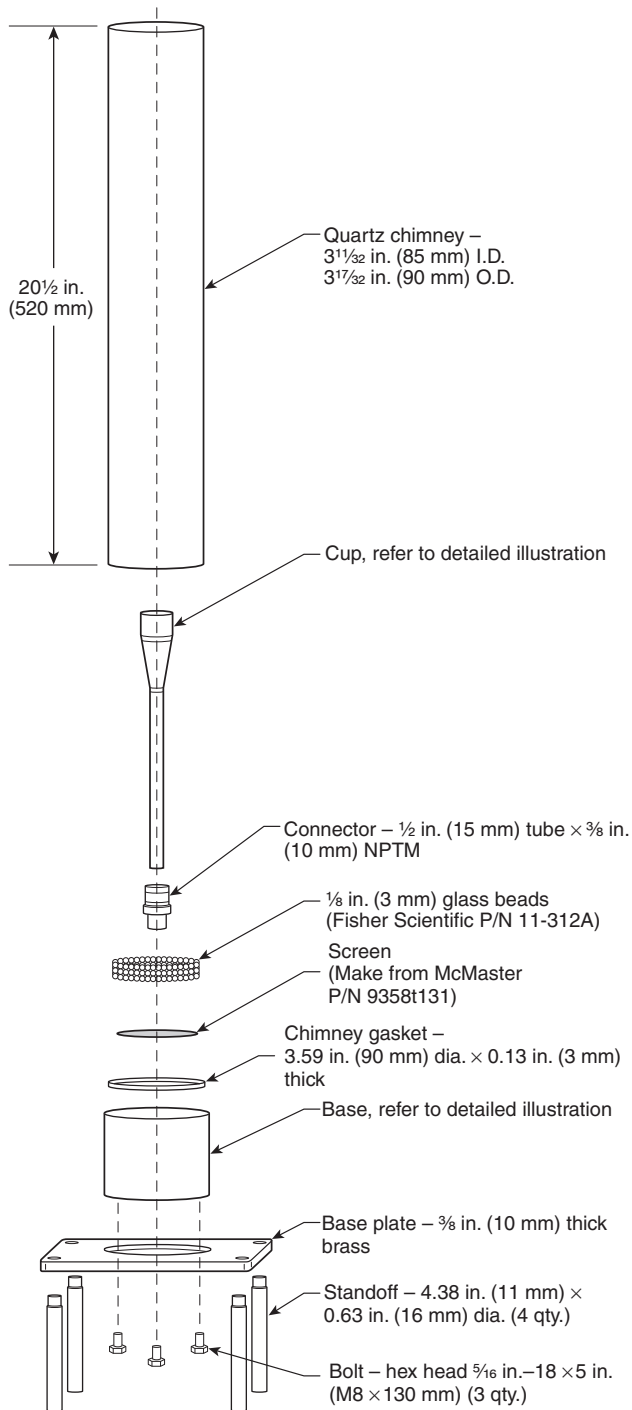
(a) Cup Burner Assembly (Exploded View).
